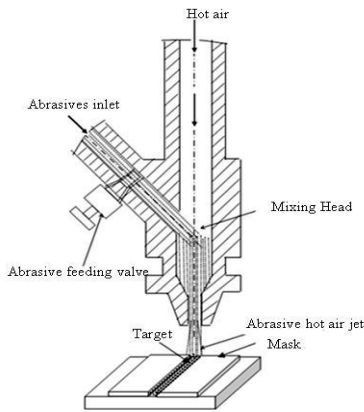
Abrasive hot air jet striking on surface of glass plate
